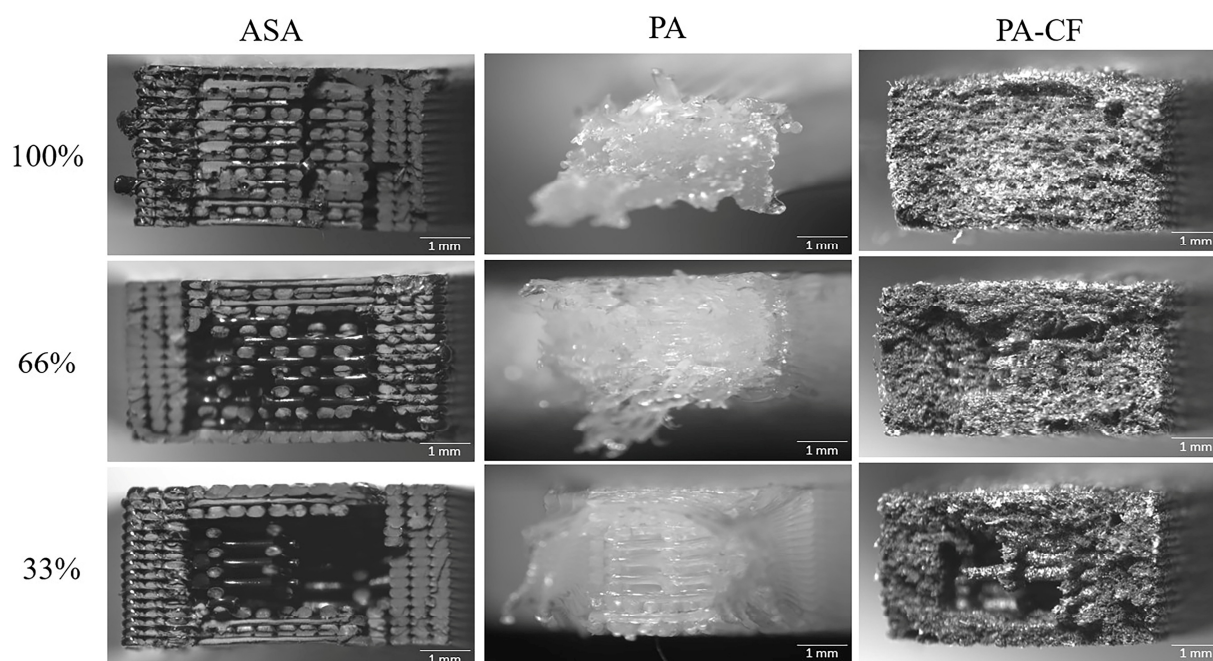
Representative fracture surfaces of ASA, PA, and PA-CF specimens after tensile testing at different infill densities (100%, 66%, and 33%).
